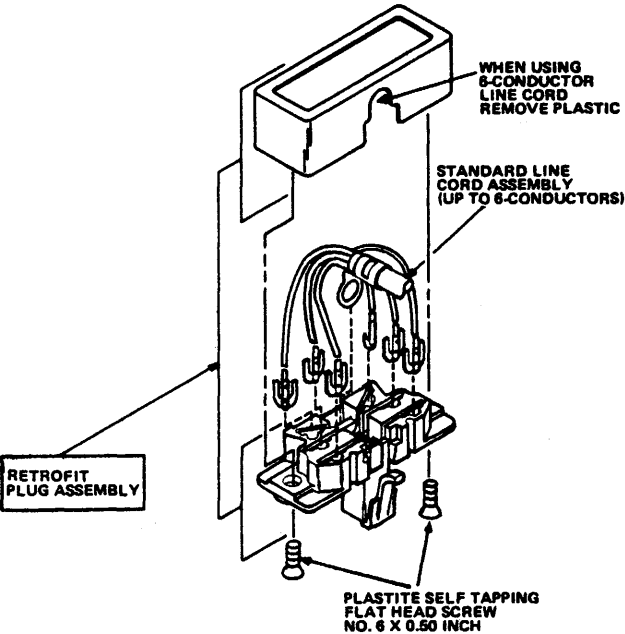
Retrofit Plug Assembly (HD-570023-A or -B).
